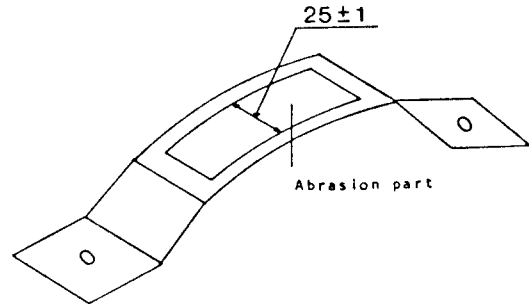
Abrasion test piece setting frame cover (unit, mm)
